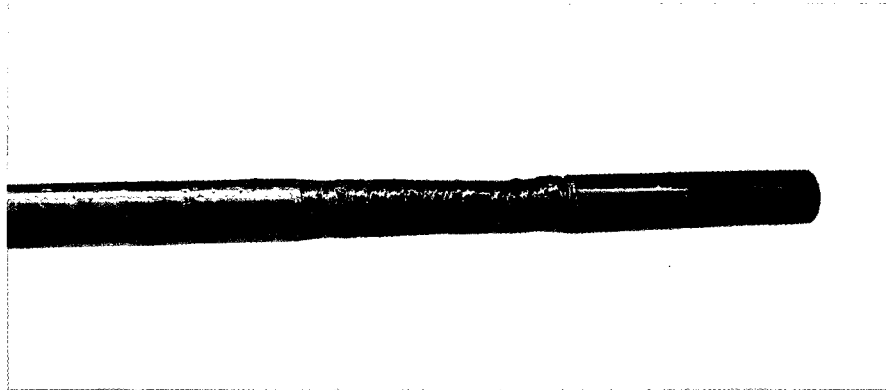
Barium metal rod assembly. A barium metal rod (center) is cut on the lathe to an outer diameter just under  $1/4$ " (to avoid jamming in the rod holder) and center drilled to accommodate a #6 – 32 threaded rod. The  $1/4$ "-diameter steel rods on the left and right are drilled and tapped to thread on to the threaded rod, which holds the assembly together. When handled in air, the barium metal is coated with mineral oil to prevent oxidation.
